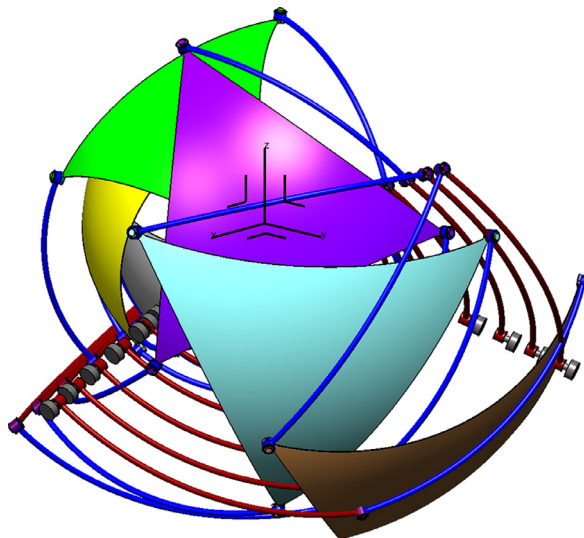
1st view of the 8 assembly modes of Robot-2.
